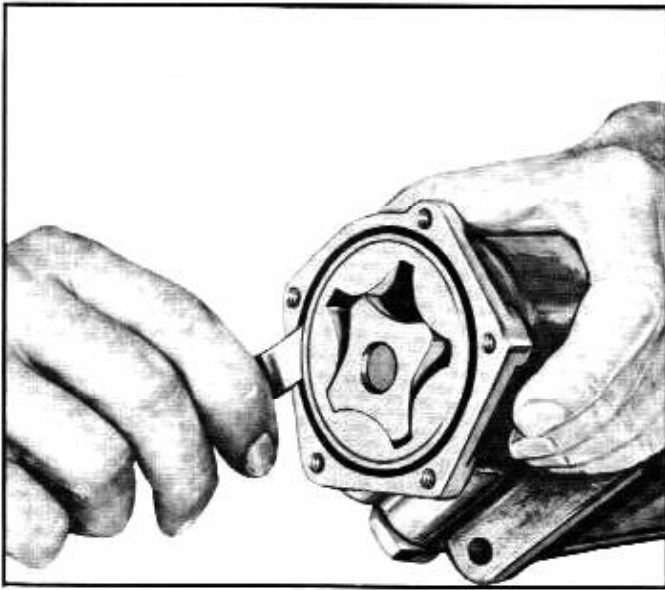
C-18—Checking Outer Rotor to Pump Body Clearance
